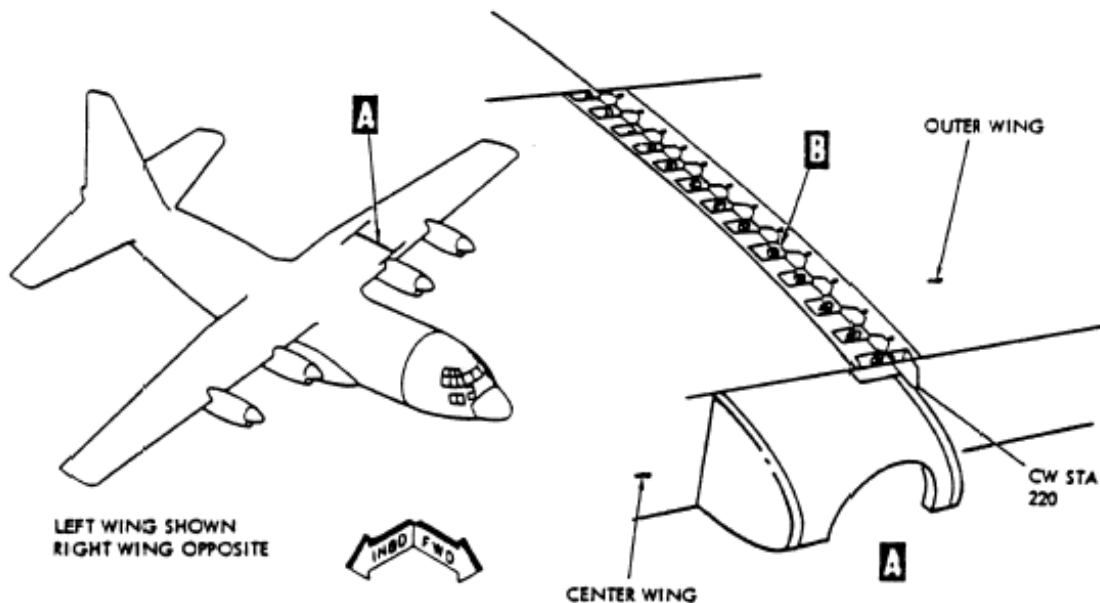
Upper Surface Wing Joint (Rainbow) Fitting, Attachment Bolt Access Cutouts (Sheet 1 of 2)
